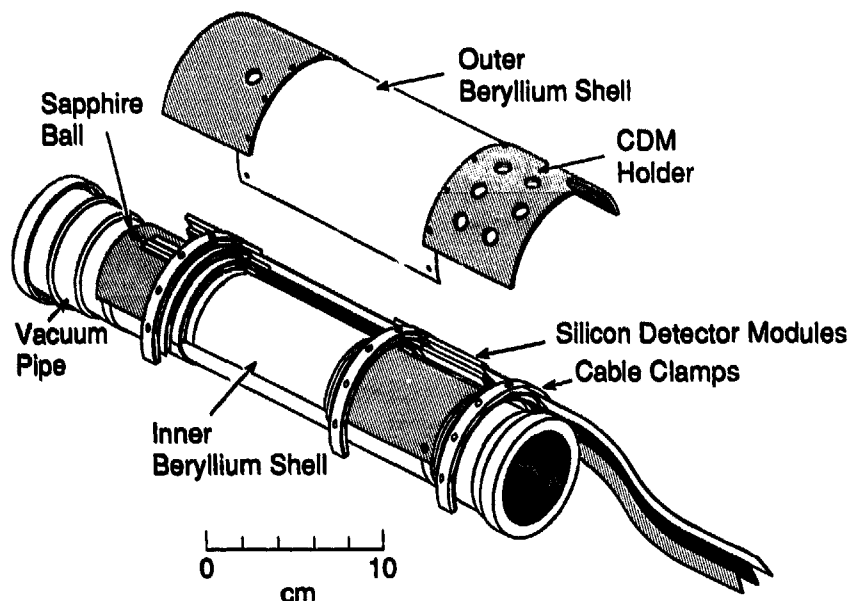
Sketch of one of the hemicylindrical support structures with a few sample detectors inserted into the slotted end pieces. The flat cables are secured by a cable clamp attached to the vacuum pipe.
